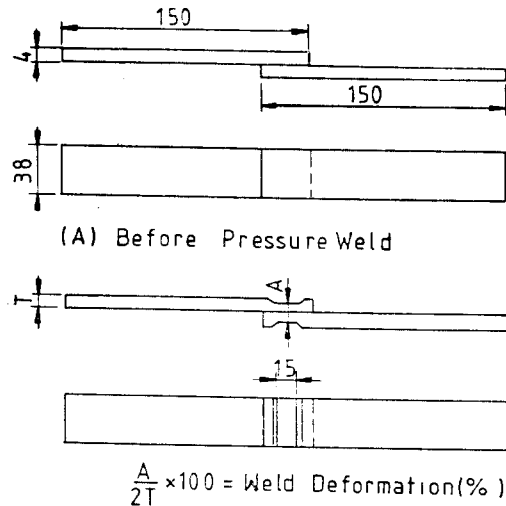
Shape of Pressure Welding Specimen.
